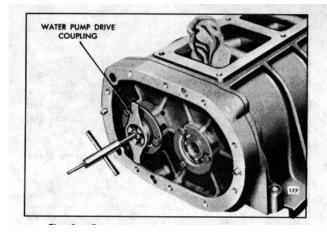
Removing Water Pump Drive Coupling Bolt from Blower Rotor Shaft
